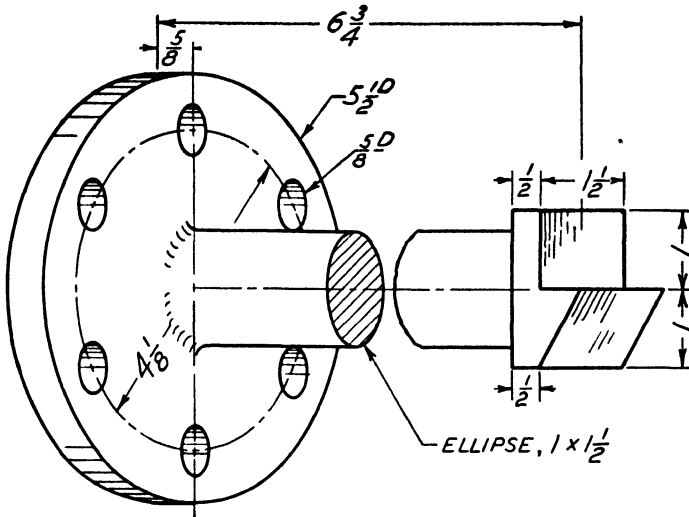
Prob. 153. Draw the necessary views of the flanged latch. Show a revolved section.
